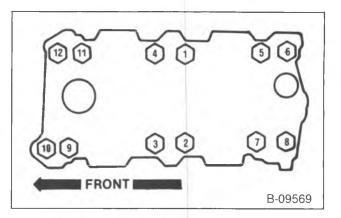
Intake Manifold Bolt Tightening Sequence (5.0L and 5.7L Engines)
